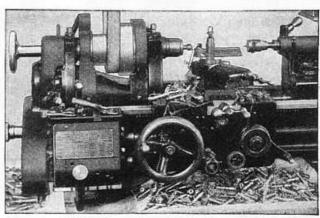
Manufacturing Small Screws on 9-inch Bench Lathe Equipped with Draw-in Chuck
